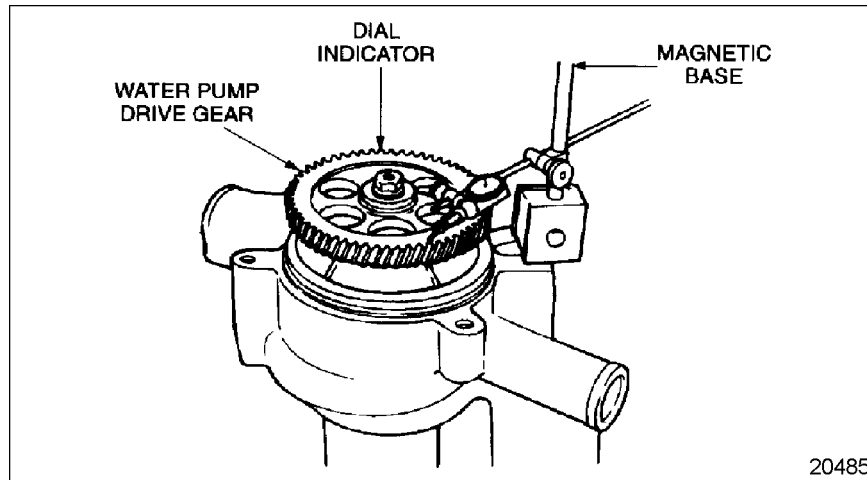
Measuring Water Pump Drive Gear Run-out
